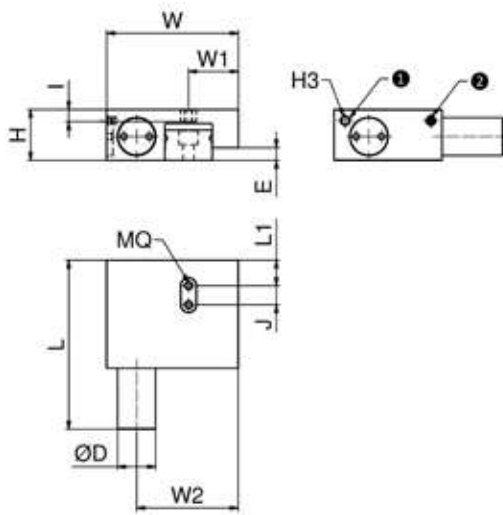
Passive pneumatic clamping elements for Miniature guides
